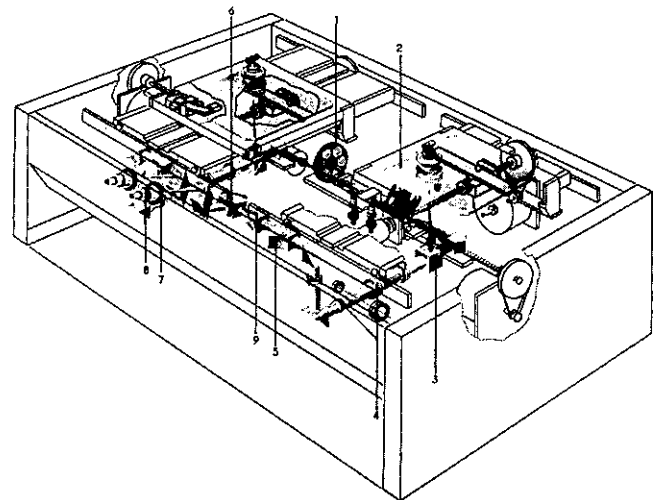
A Zeiss Jena Dicometer - mechanical construction
